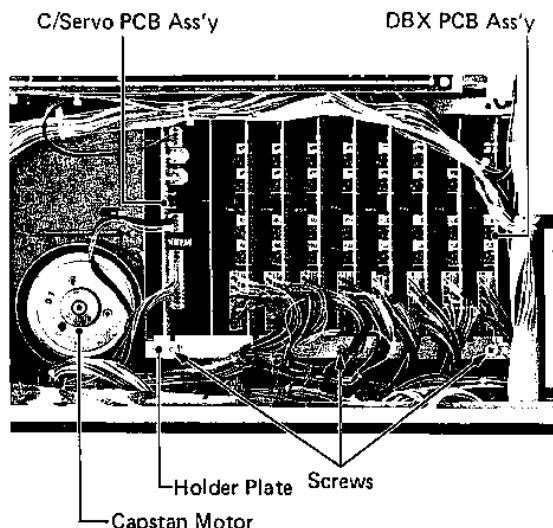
REMOVAL OF DBX & CAPSTAN SERVO PCB CARDS
